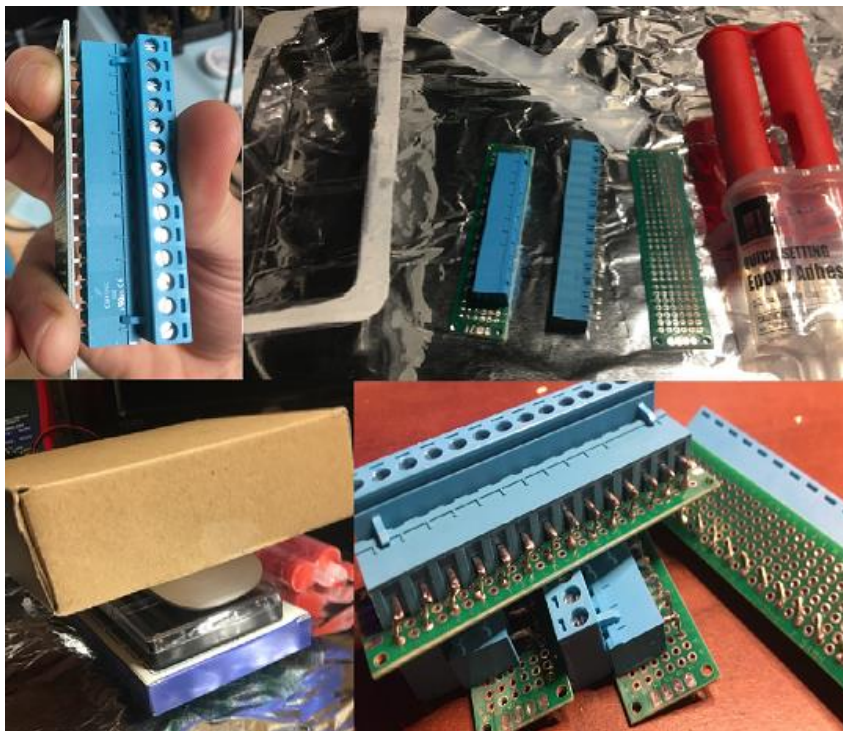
Building and soldering the terminal block prototyping boards.
